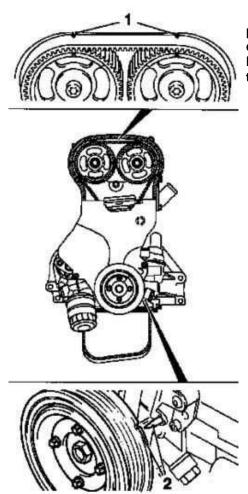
Install the crankshaft position at top dead center (TDC) of cylinder number 1: 1 - marks on the lid of the cylinder head, 2 - a label at the crankshaft
